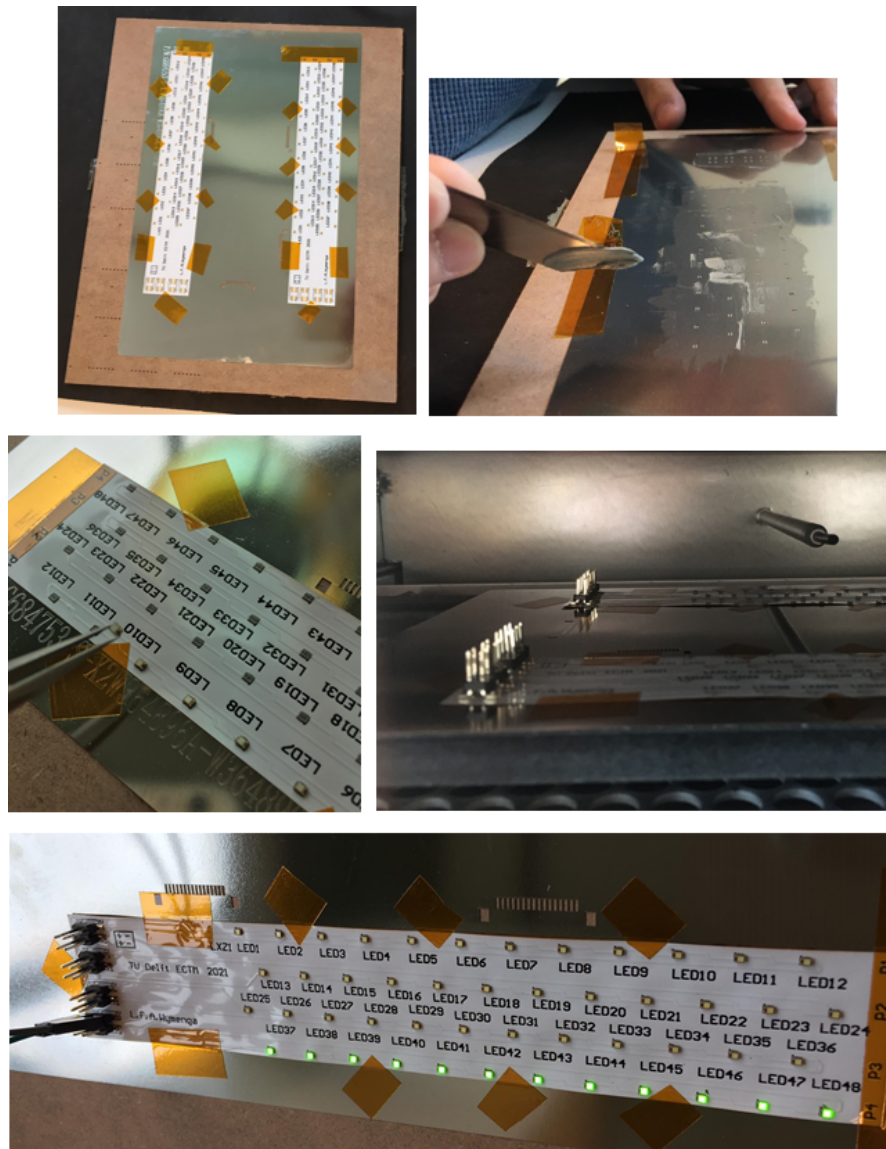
Top left: Placement of flexible sheets onto carrier, Top right: Filling holes through stencil with solder paste. Middle left: Placement of components, Middle right: Heating of LED panels for solder paste fixation. Bottom : Complete LED panel, testing of bottom row.
